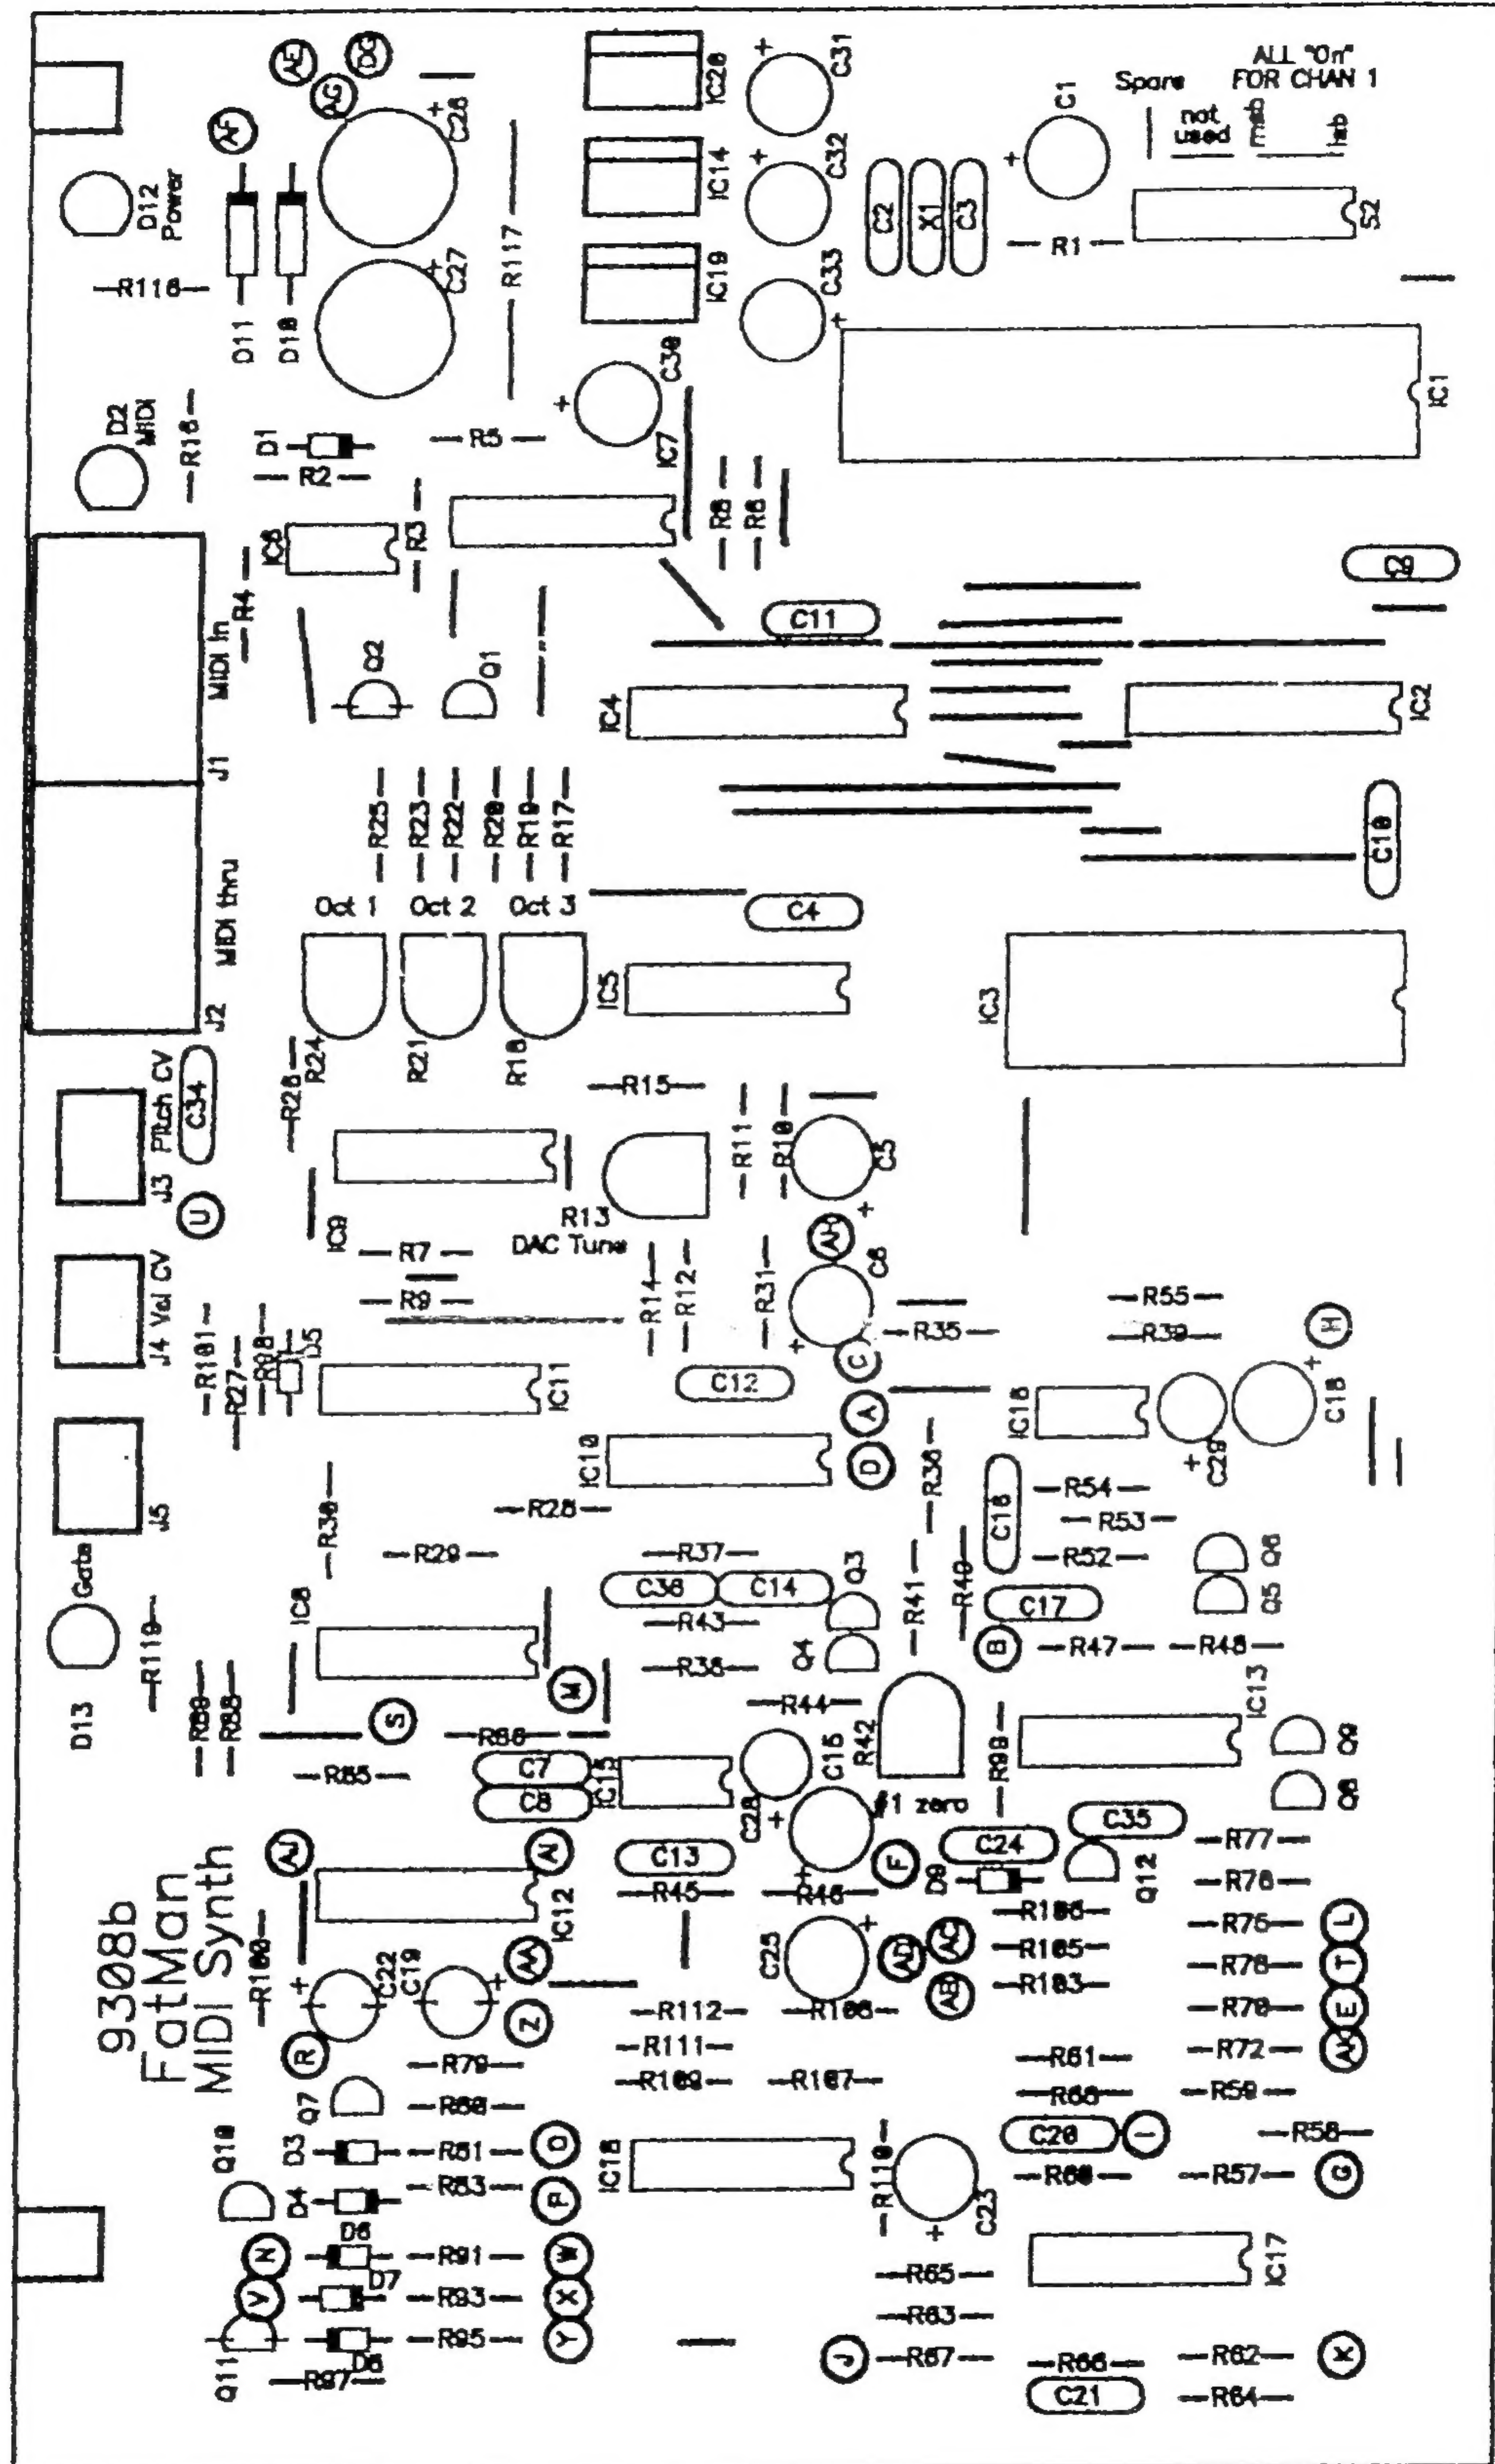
Components are placed on the FatMan circuit board as shown in this parts placement drawing
